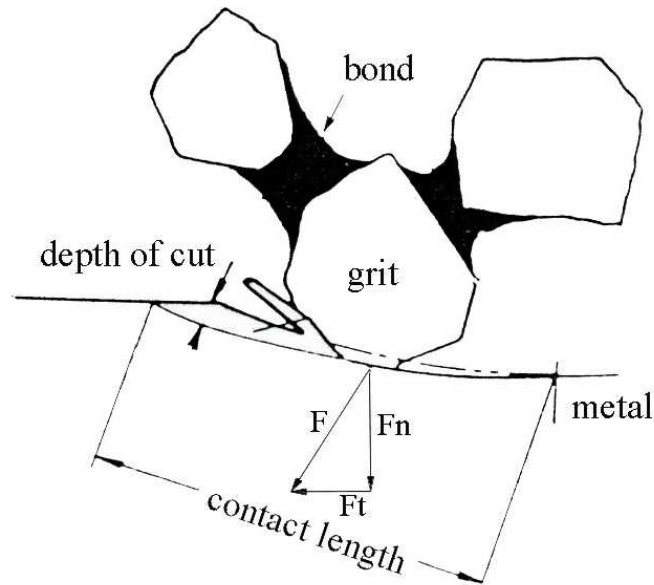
Illustration of a grinding wheel grit cutting into the workpiece
